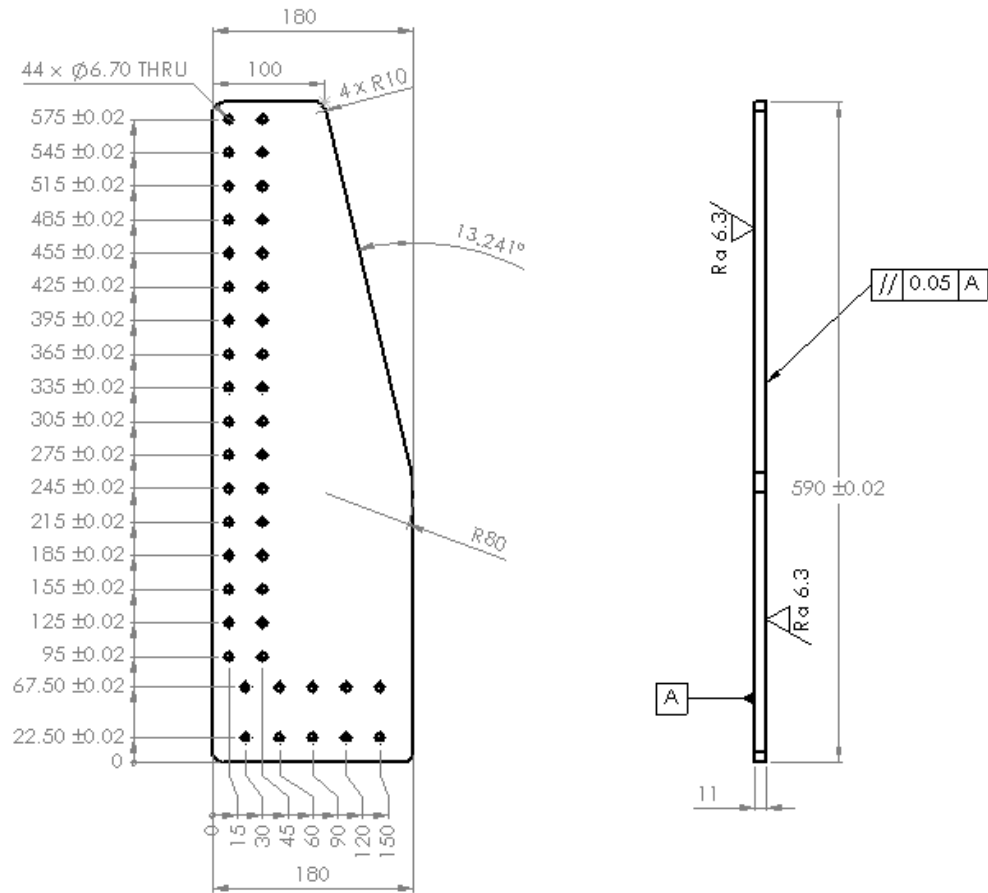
Technical drawing of the side plates (2 identical plates are manufactured).Material St37.
